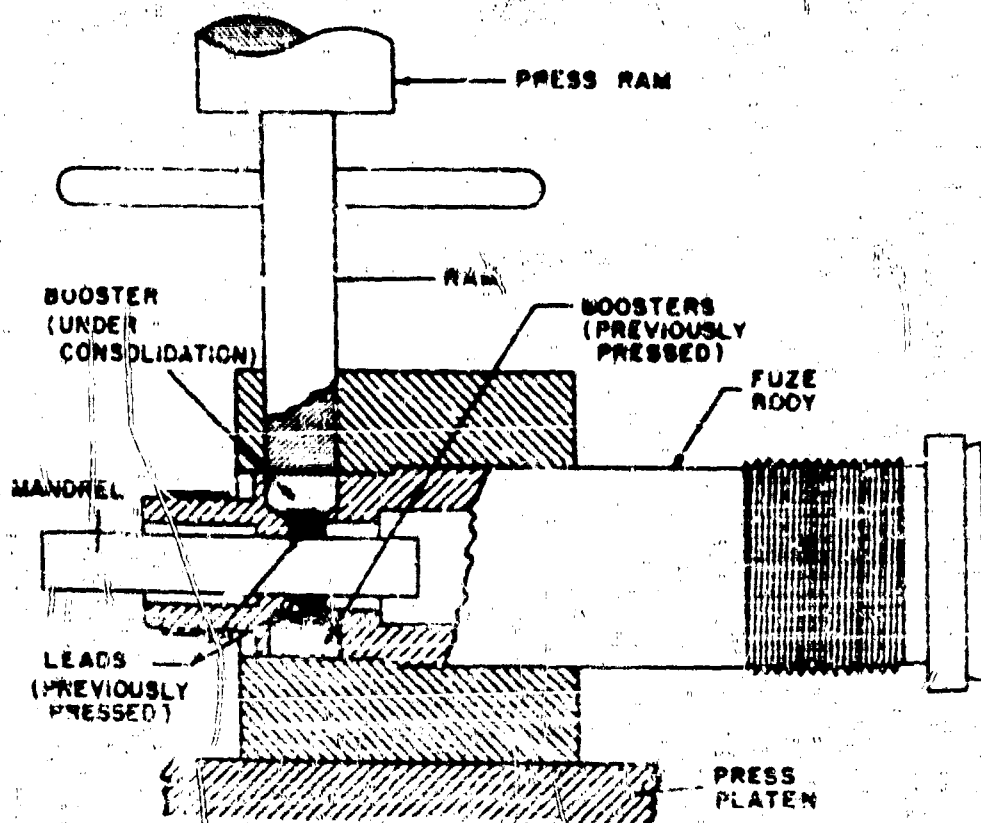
Hand Loading Tool for Boosters. Sectional View.
